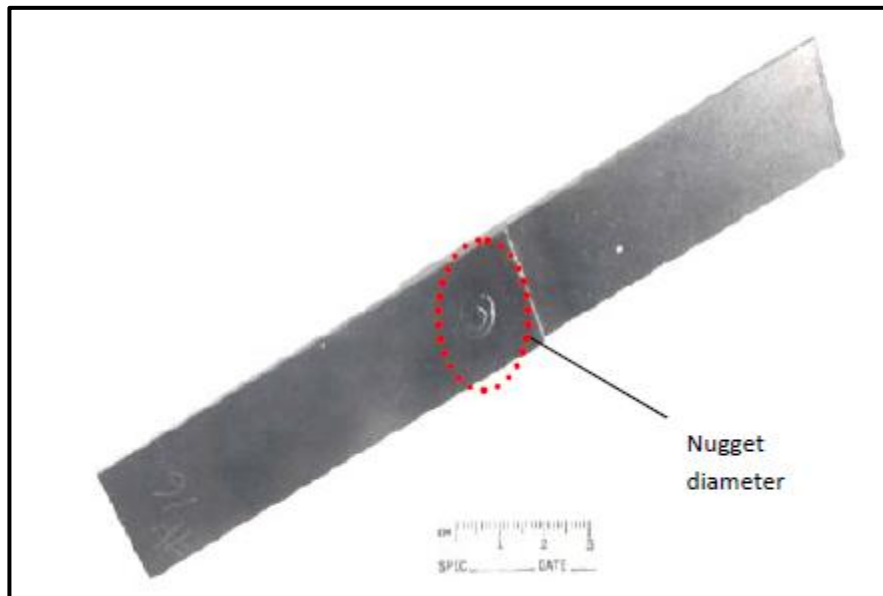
Specimen of Sheet Metal which is Lap Joints using the Resistance Spot Welding Machine
